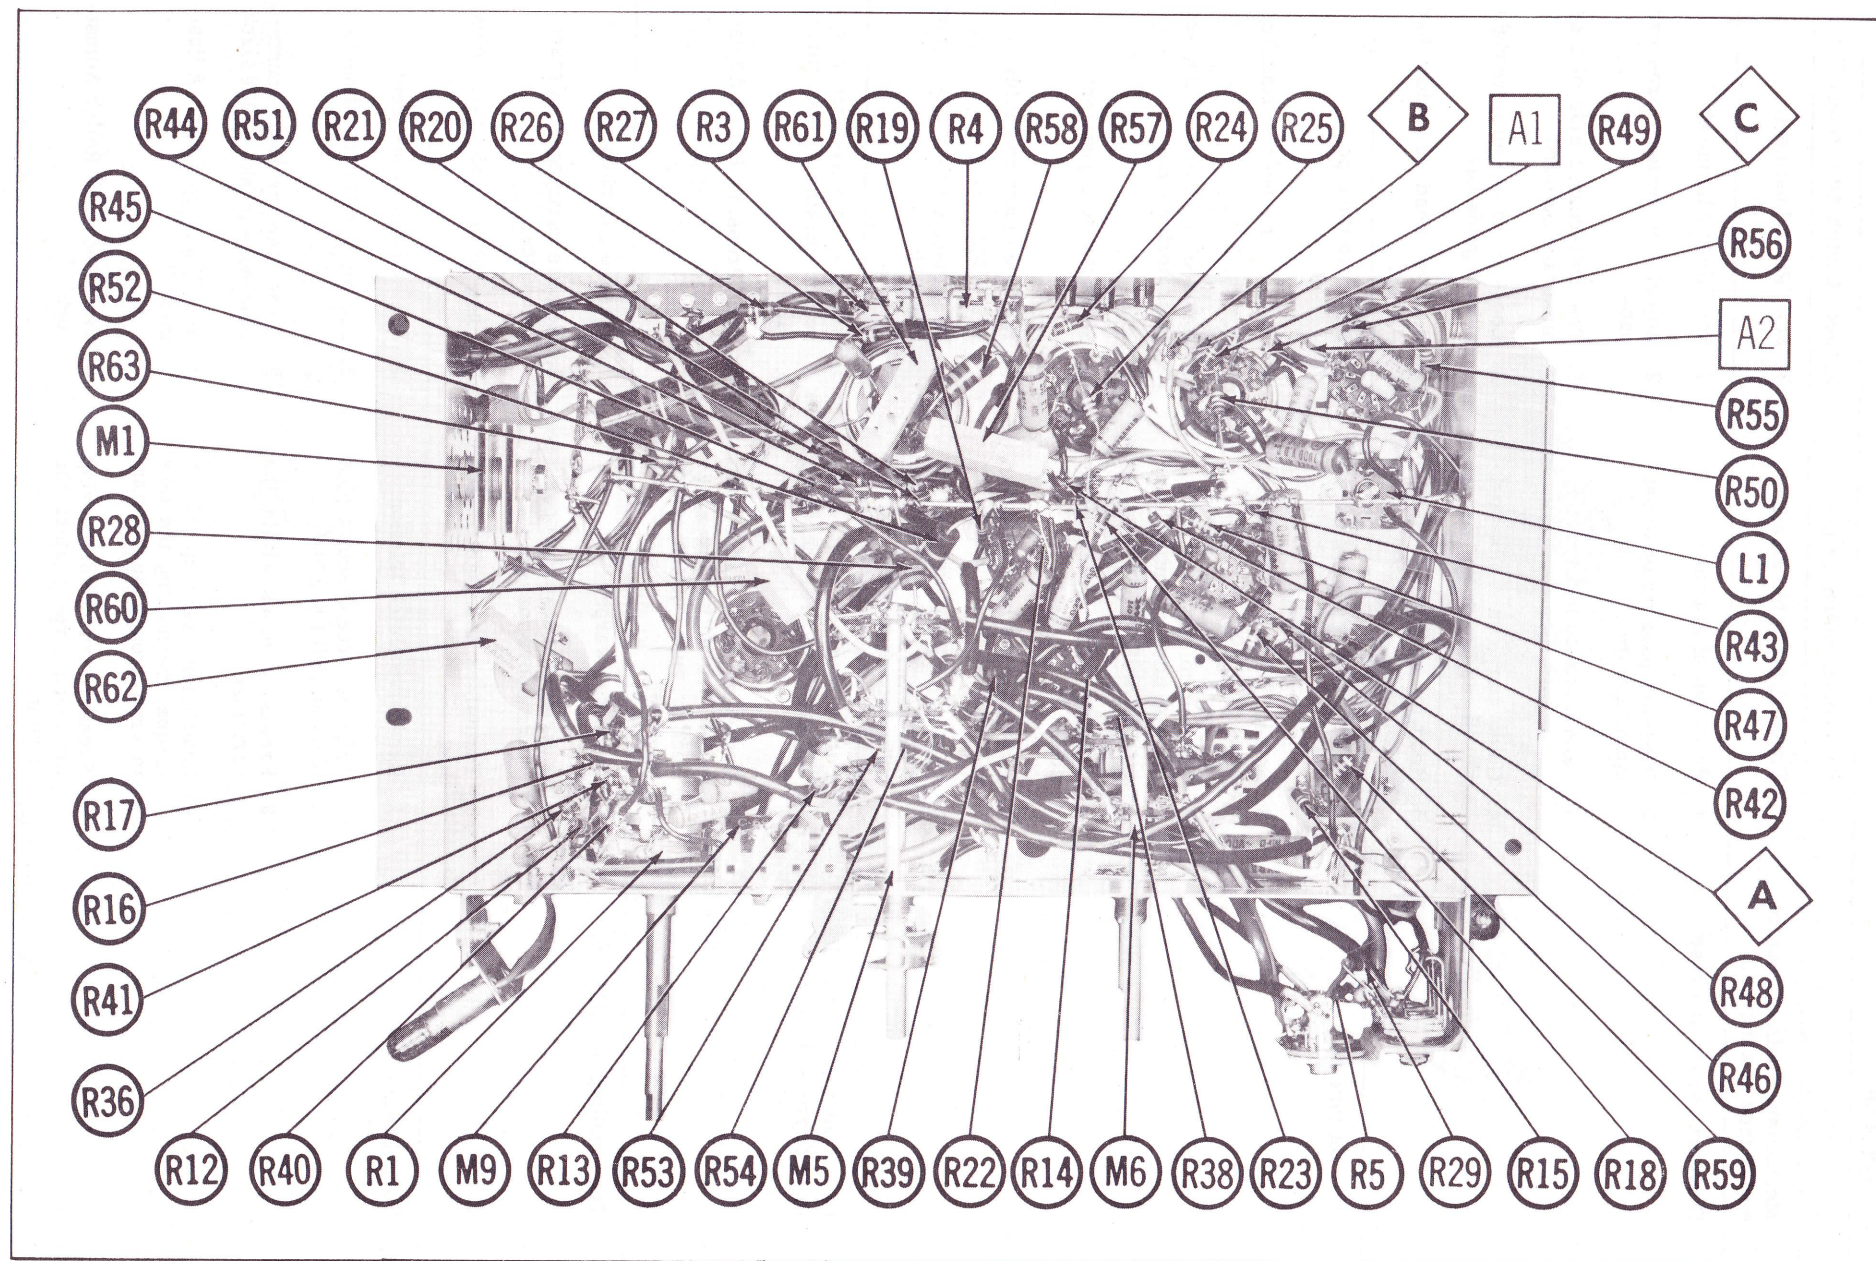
AMP CHASSIS BOTTOM VIEW - RESISTOR, MISC & ALIGNMENT IDENT.
